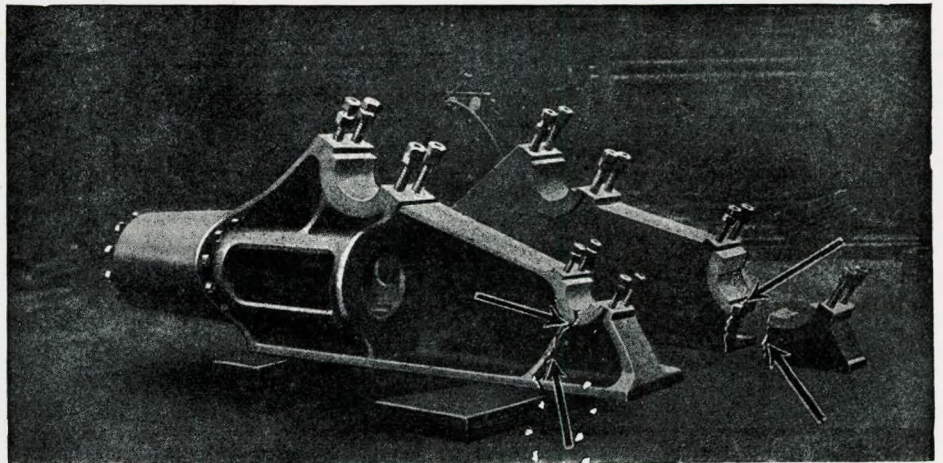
This heavy winch frame had the crankshaft bearing housing broken away at one side and was severely cracked on the opposite bearing. Here again the essential strength and correct alignment were secured by thoroughly experienced scientific welding operators.
